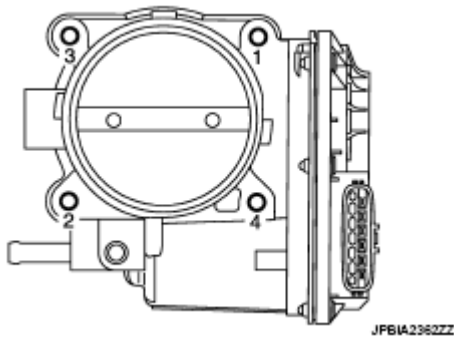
Identifying Electric Throttle Control Actuator Mounting Bolts
